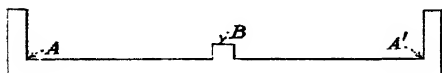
FORM OF CASTING THAT REQUIRES FILLETS.
